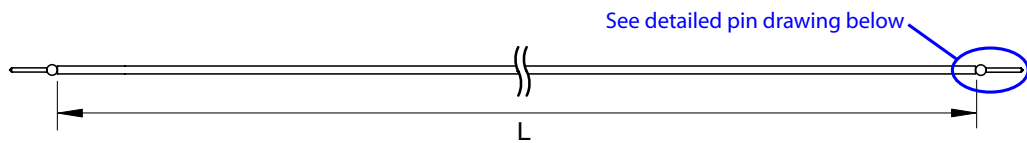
Outline drawing and dimensions for DC-DIYsig1, 1-way DIY signal wire. See table below for dimensions.
